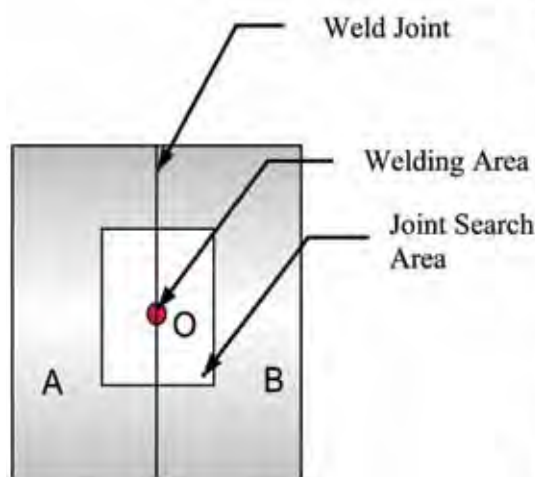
Scheme showing the Beam-Scanning Method for the Joint Search and Surface Visualization, Weld Piece of Complex Geometry Scanned in Reflected Electrons Mode
